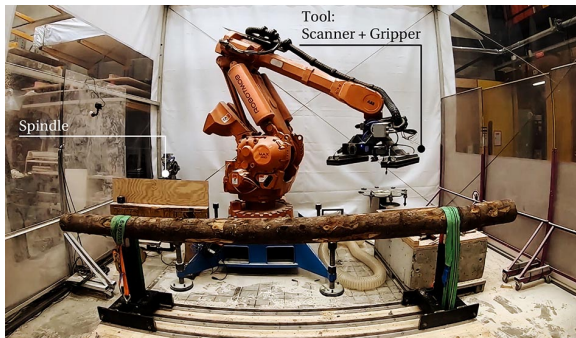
Laser scanner is positioned on a vacuum gripper. When the scan is finished the tool is automatically changed to the spindle
